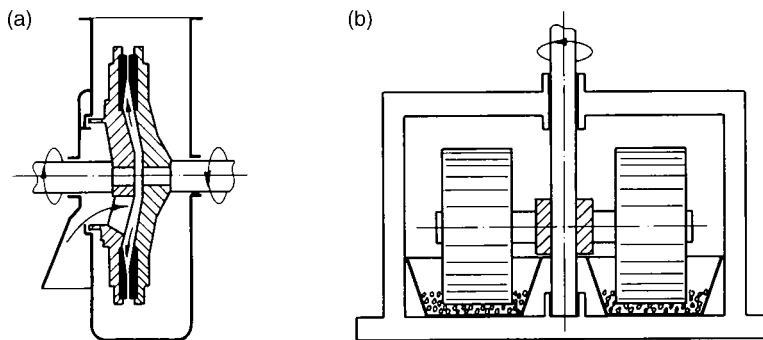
(a) Disk mill and (b) edge mill. (From Leniger and Beverloo, (1975), courtesy of Springer.)
